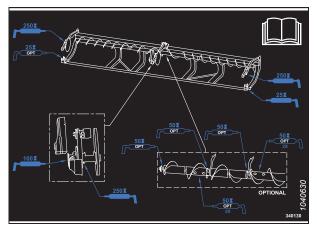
Decal for Double-Knife Header with Three Piece Upper Cross Auger
